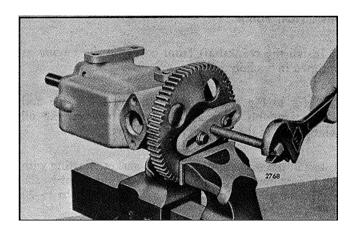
Removing Oil Pump Drive-Driven Gear
